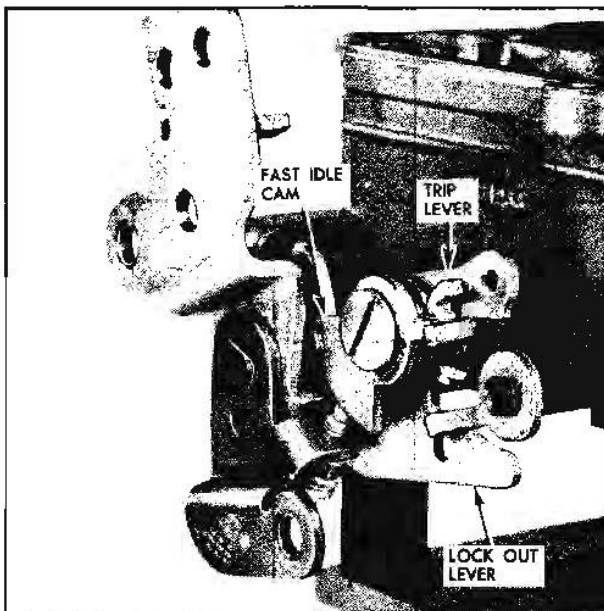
B-82 Location of Fast Idle Cam and Lockout Lever
